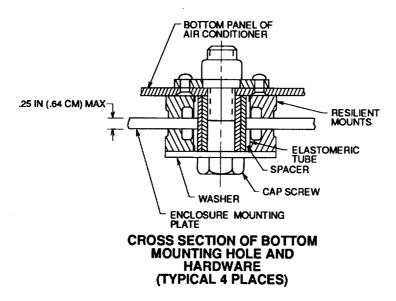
Installation Dimensions (Sheet 3 of 3)
